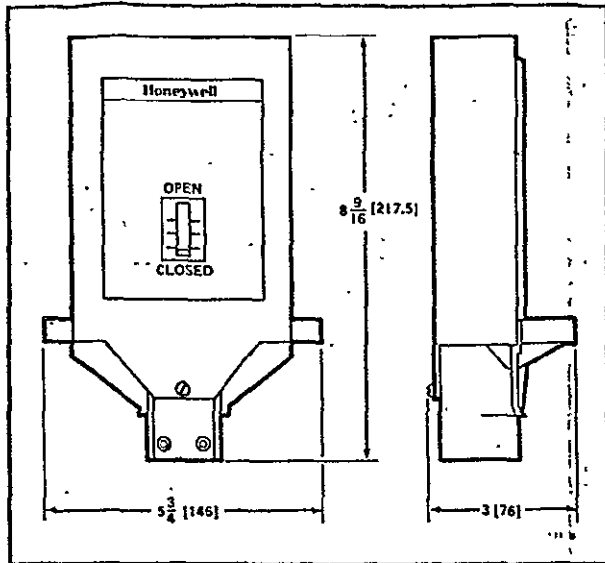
Q618 INSTALLATION DIMENSIONS, IN INCHES [MILLIMETERS SHOWN IN BRACKETS].
